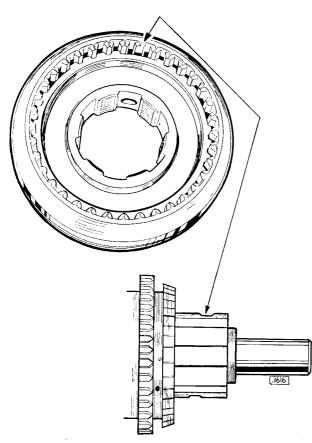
The relieved tooth at the wide chamfer end of the outer operating sleeve must be in line with the foremost groove in the mainshaft.
